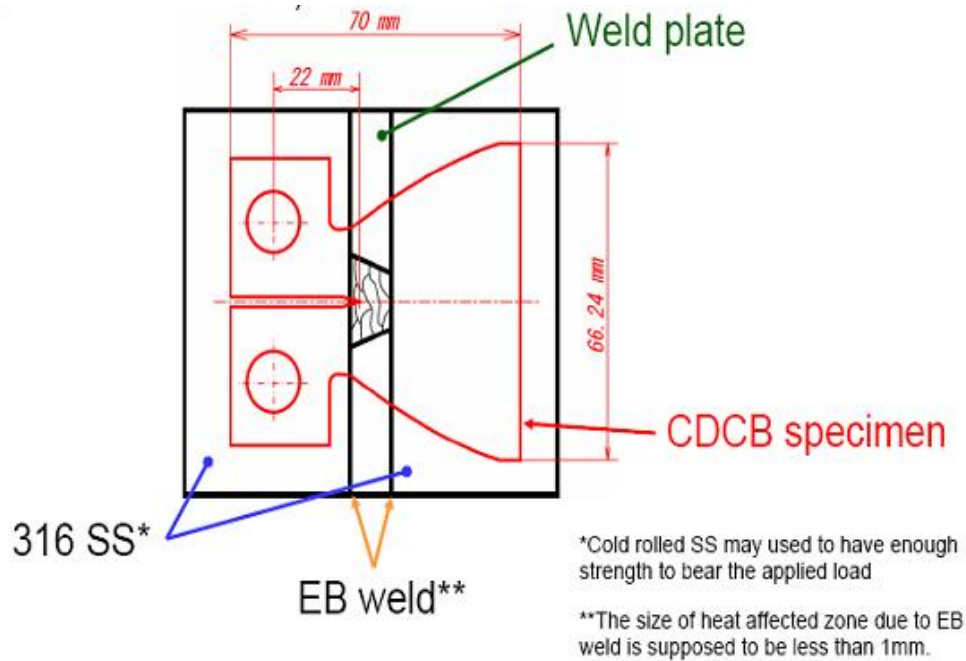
The manufacturing of the composite CDCB specimens by using EB welding, where the manufactured plates having hot cracks buried inside the weld metal are inserted between the cold-worked AISI 316 austenitic stainless steel plates and EB welded, so that the HAZ is less than 1 mm wide.
